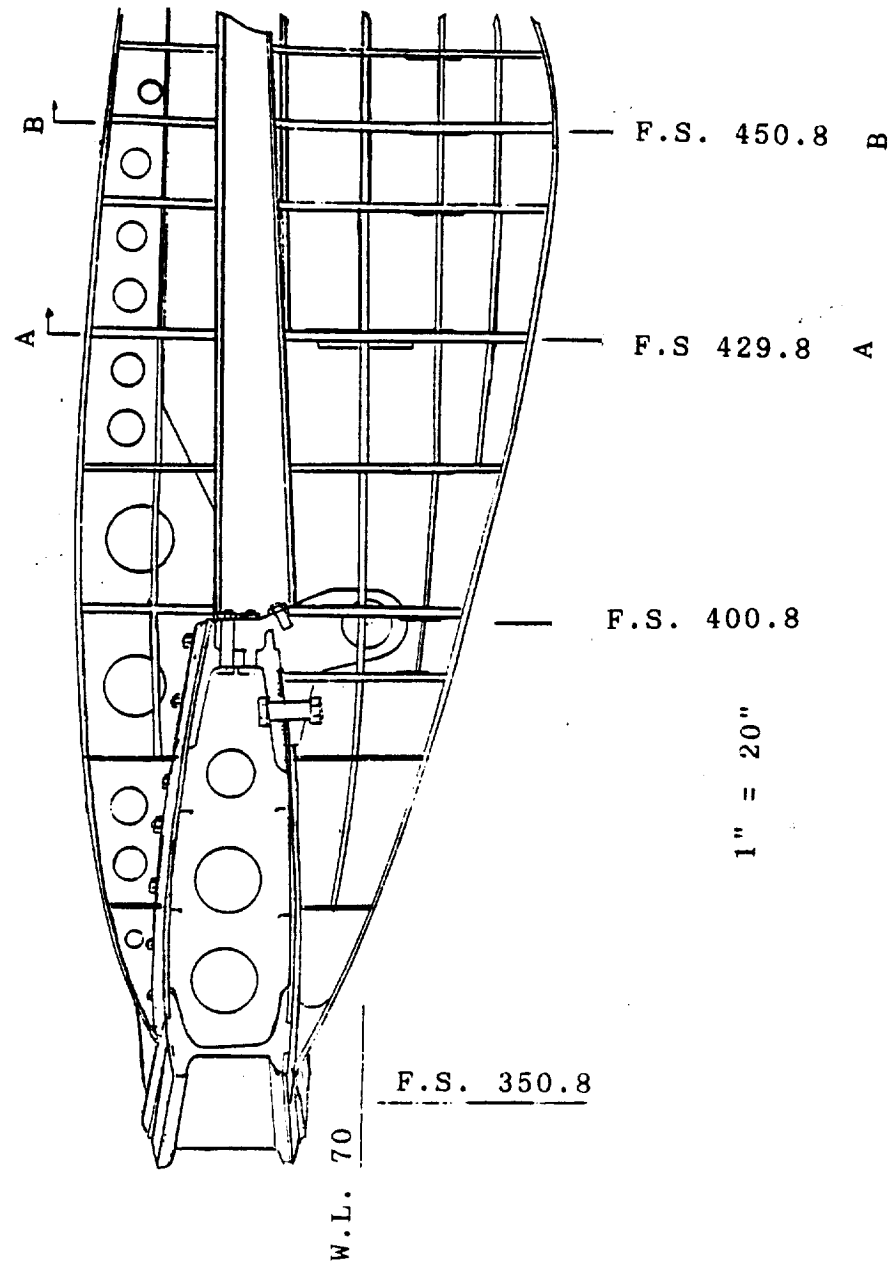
Boom and main gear attachment for the Ugly airplane. (Side view)
